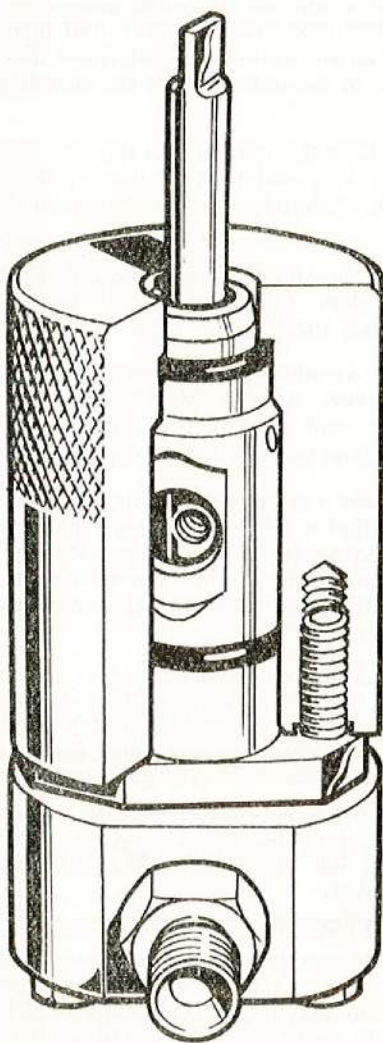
Pressure testing the pressure drop lever hinge seal (fixture T.262317)
